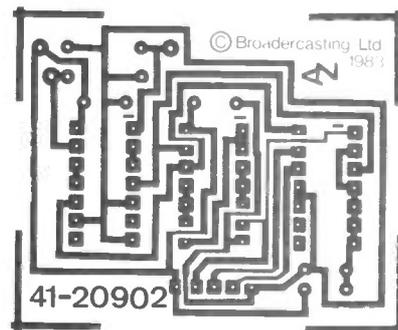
PCB foil pattern for Rotary Encoder Interface (Sept '83).
